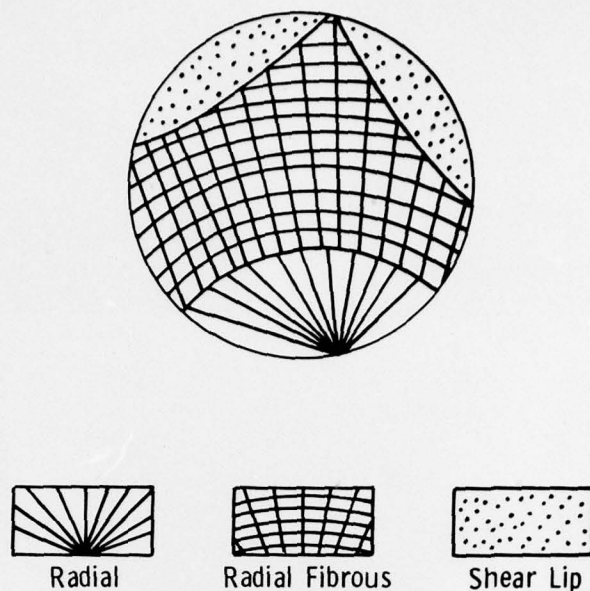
Schematic of the fracture surface zones on round tensile fatigue specimens.
